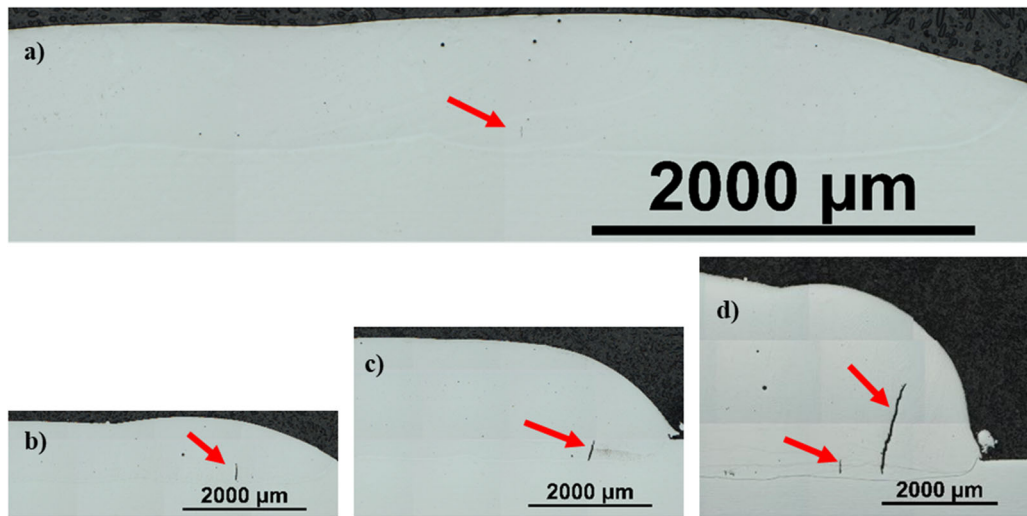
Optical microscope images of interfaces with 66 pct SS304L in the first layer. (a) a single layer print, (b) a 2-layer print, (c) a 5-layer print, and (d) a 10-layer print. Each show crack(s) of increasing size as more layers are printed, as indicated by red arrows (Color figure online).
